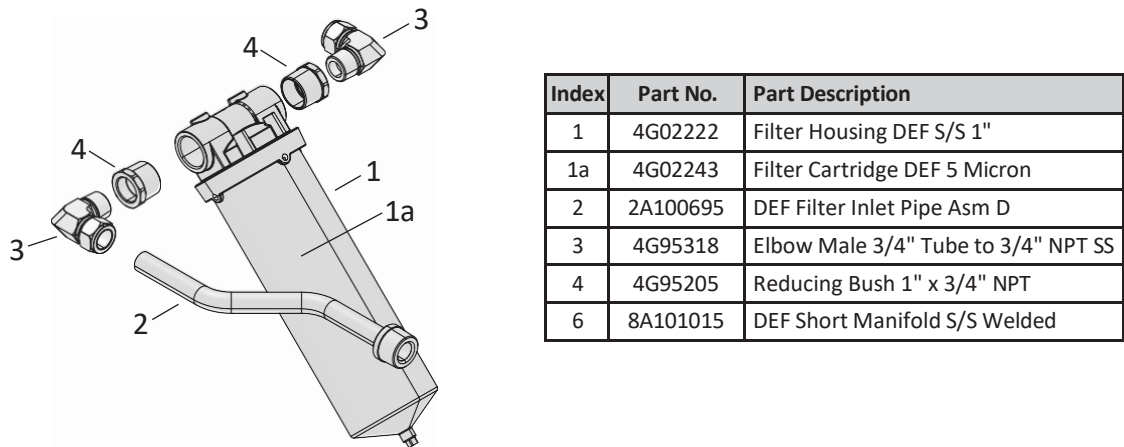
Filter Assembly DEF PULSE Angled (Part # 2A02466A)
